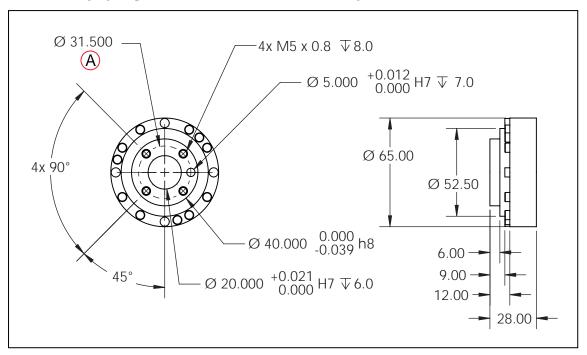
Tool Flange Dimensions for Viper Robots - (A) is Bolt Circle. (units in mm)
